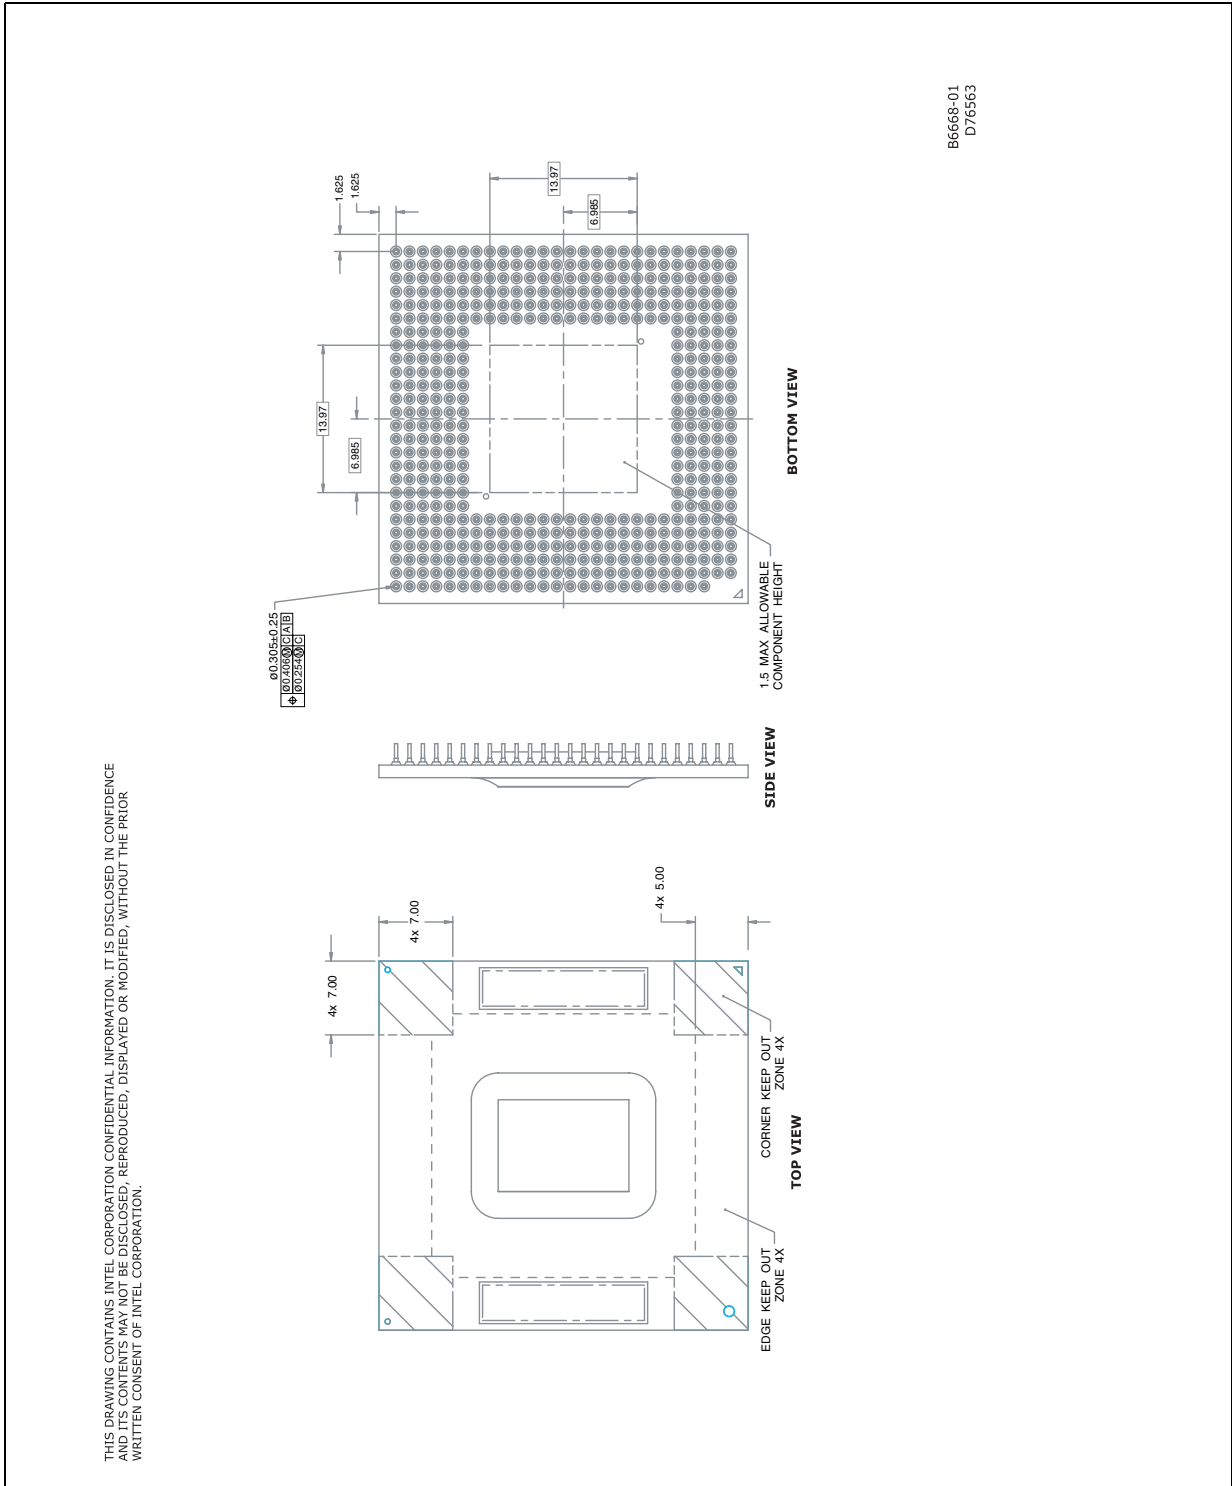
6-MB and 3-MB on 6-MB Die Micro-FCBGA Processor Package Drawing (Sheet 1 of 2)
